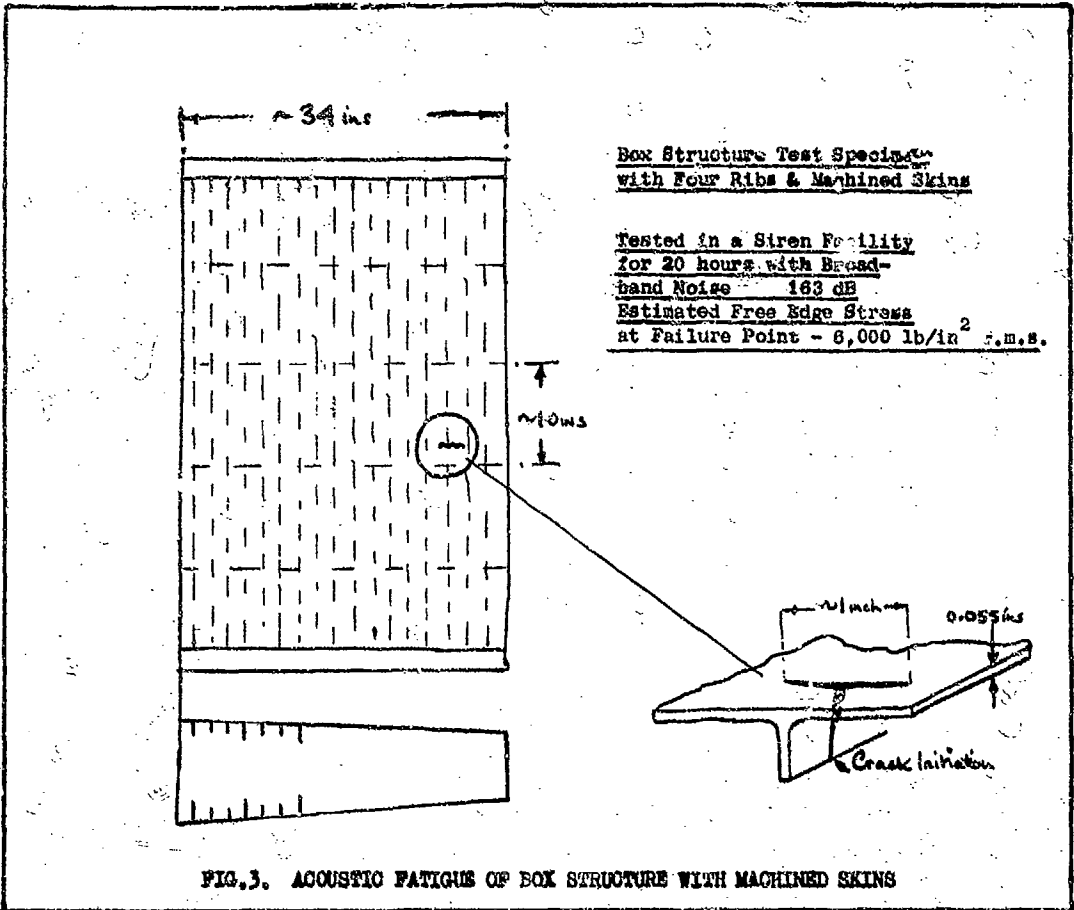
ACOUSTIC FATIGUE OF BOX STRUCTURE WITH MACHINED SKINS
